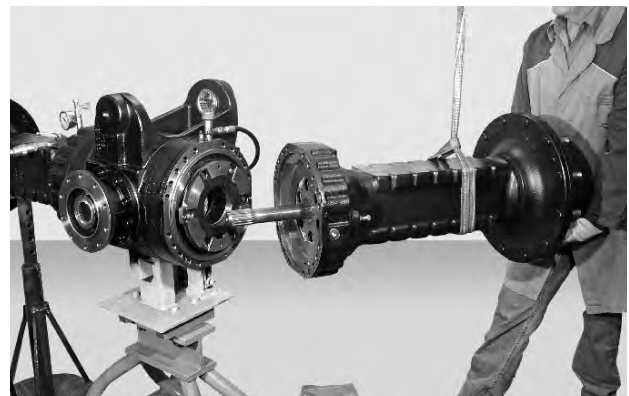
Remove arm together with brakes and axle shafts; lay down the arm vertically. Release pressure.
